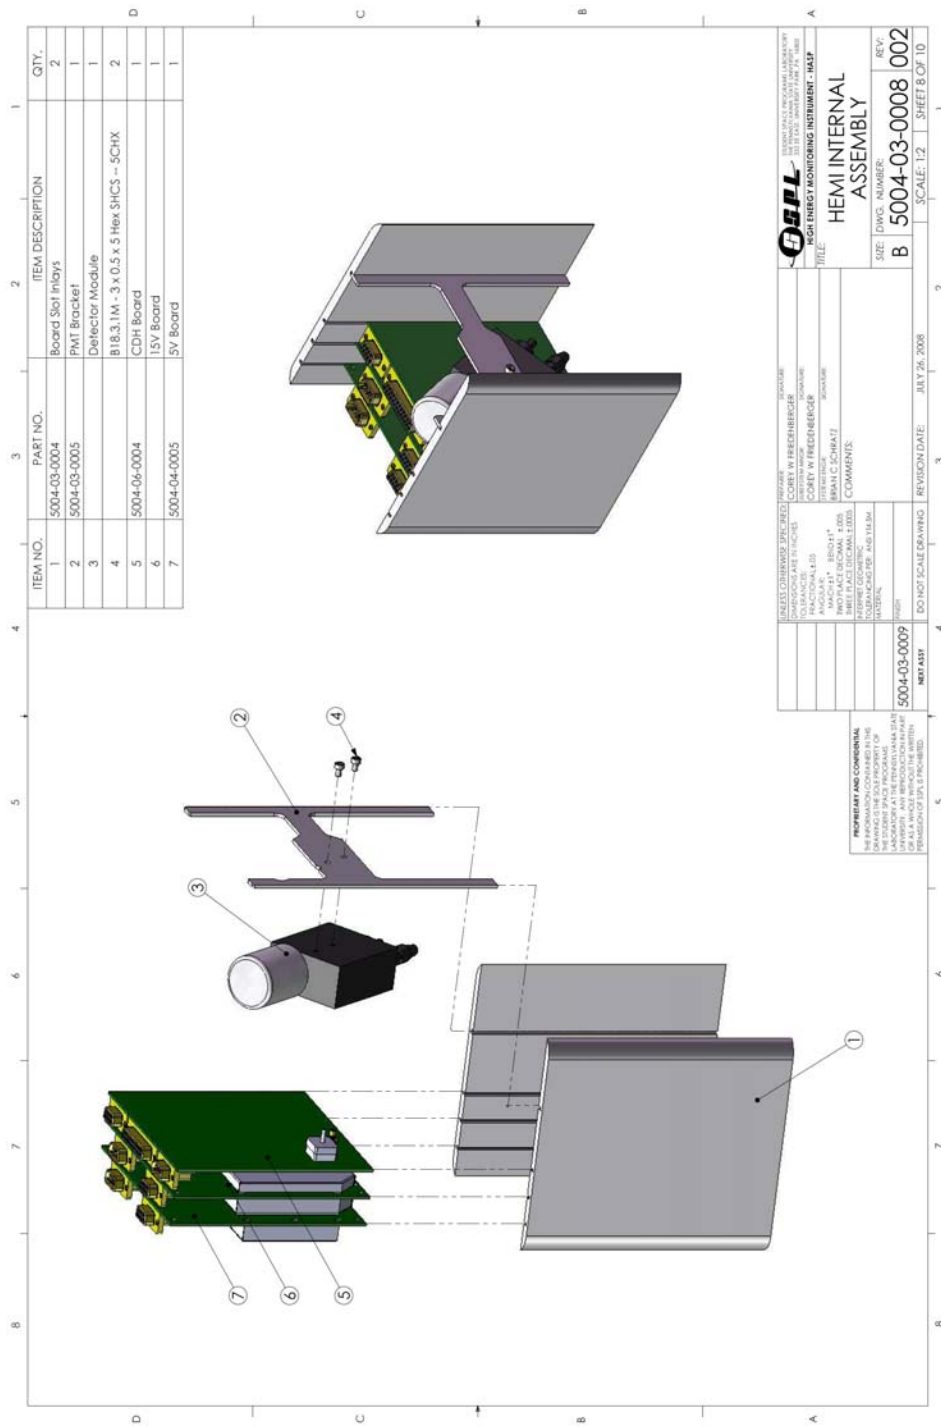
Mechanical Drawing: HEMI Internal Assembly
